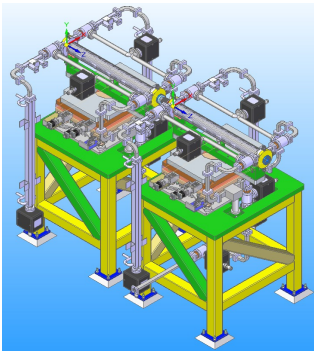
Technical drawing of the supports for the two PolariX TDSs at FLASH2. Courtesy of M. Föse.
